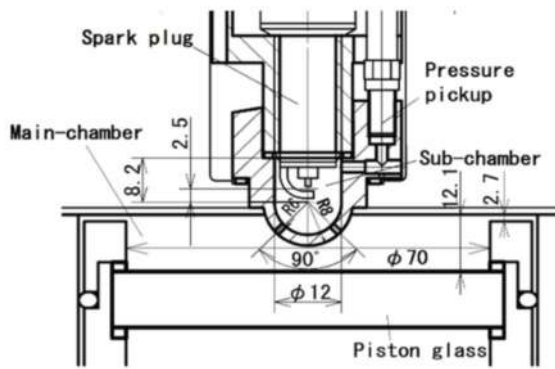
Sectional view of the combustion chamber showing the main chamber and the pre-chamber with their respective dimensions listed in the table.
